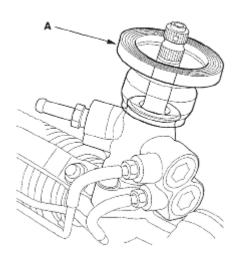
Identifying Pinion Shaft And Wheel Well Opening On Body Courtesy of AMERICAN HONDA MOTOR CO., INC.
